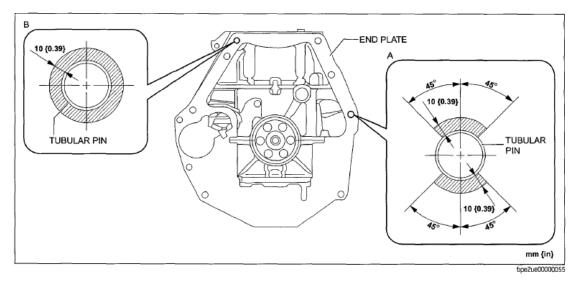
Identifying End Plate Assembly Crimp Dimension
